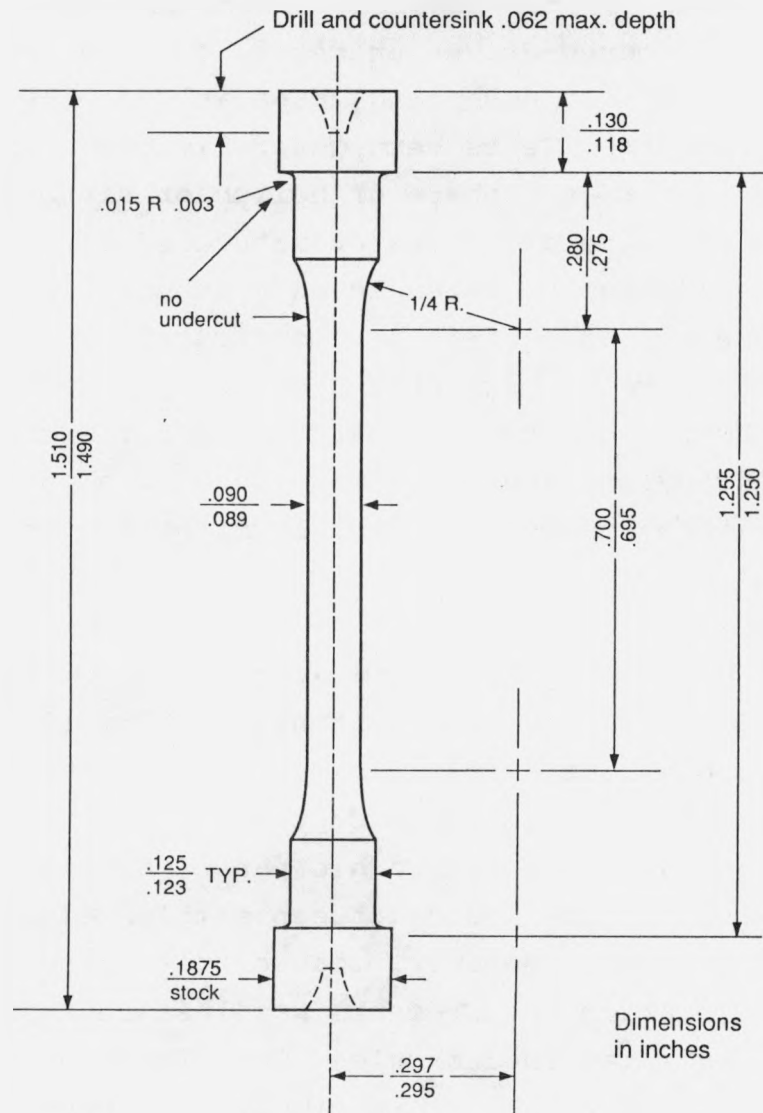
Round tensile specimen machining specifications. Samples given a hand or electropolish after machining and before testing.
